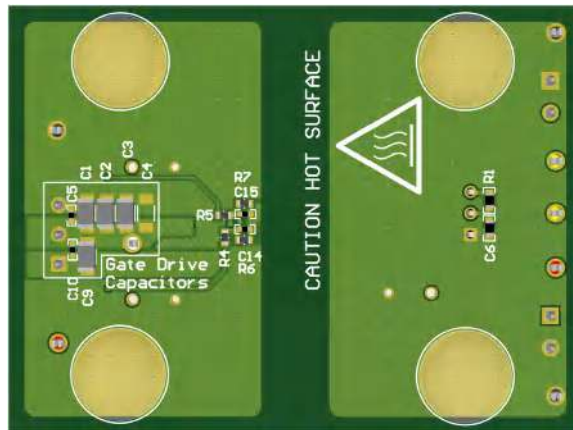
UCC14240EVM-052, Fully Assembled 3D Bottom View
